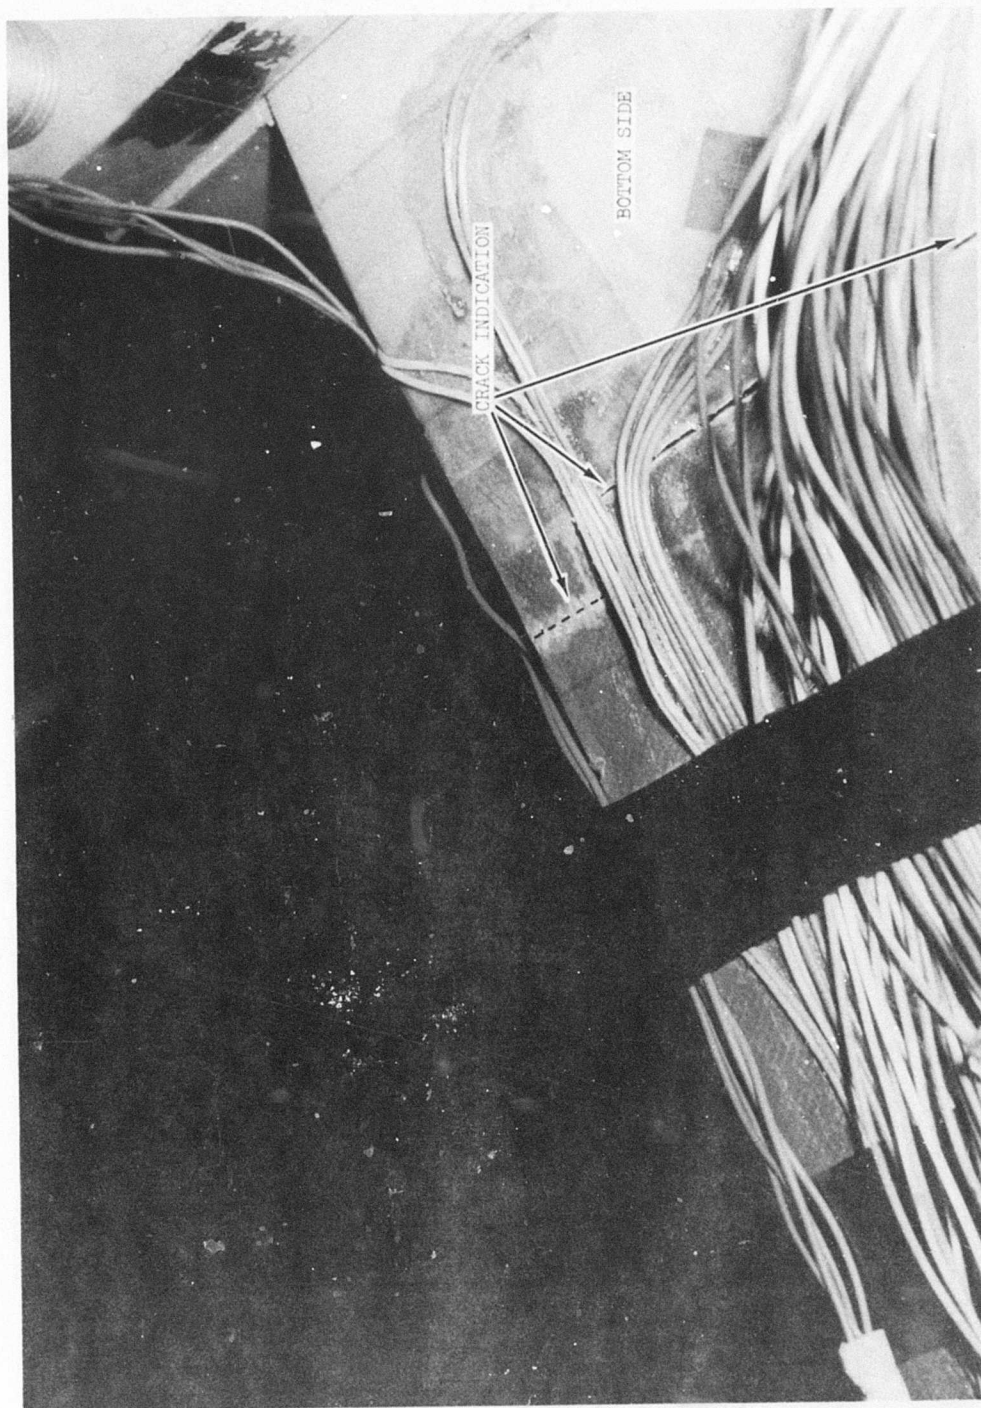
Closeup of Fatigue Test Specimen Depicting Crack Indication on Bottom Side.
